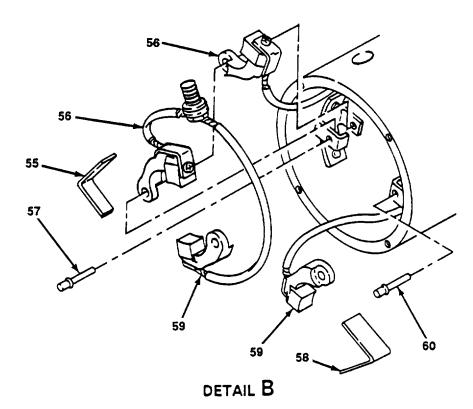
Starter, Assemble (Sheet 2 of 2).
